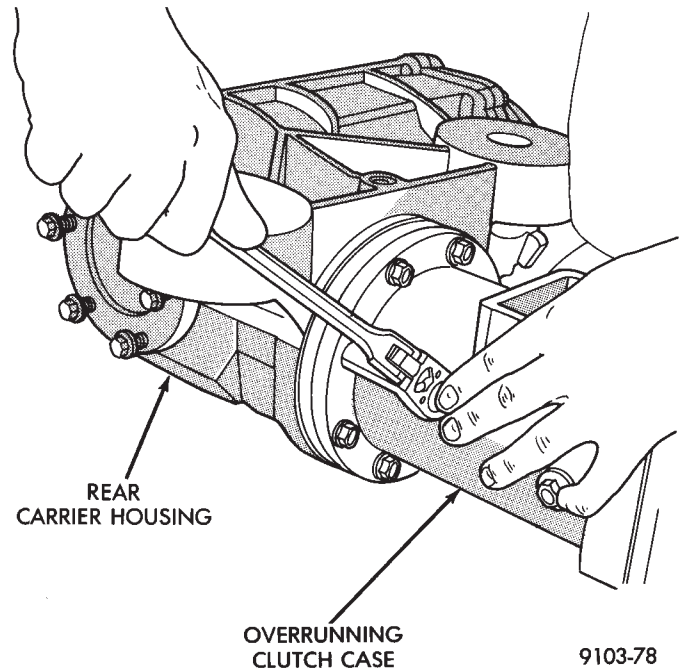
Overrunning Clutch Housing to Rear carrier Bolts
